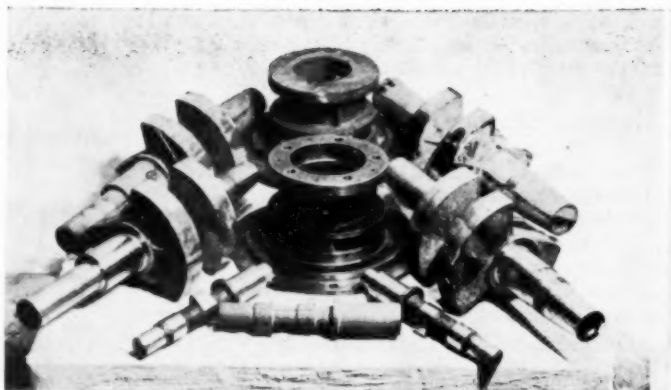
Group of castings in Acicular Cast Iron, showing crankshafts, camshafts and wheel hubs as cast and machined.
